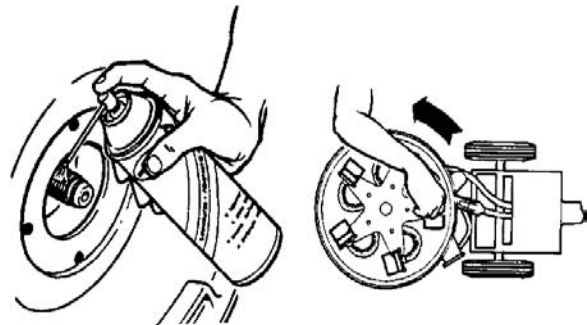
Lubricate Shaft and O-Ring; Rotate Head Counterclockwise
